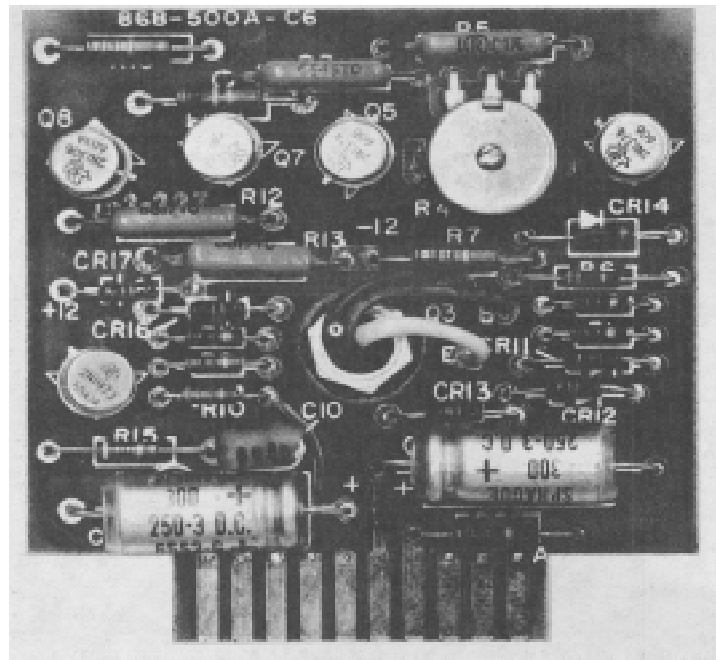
Regulator Card and Bracket Assembly (868. 500A-C6)
